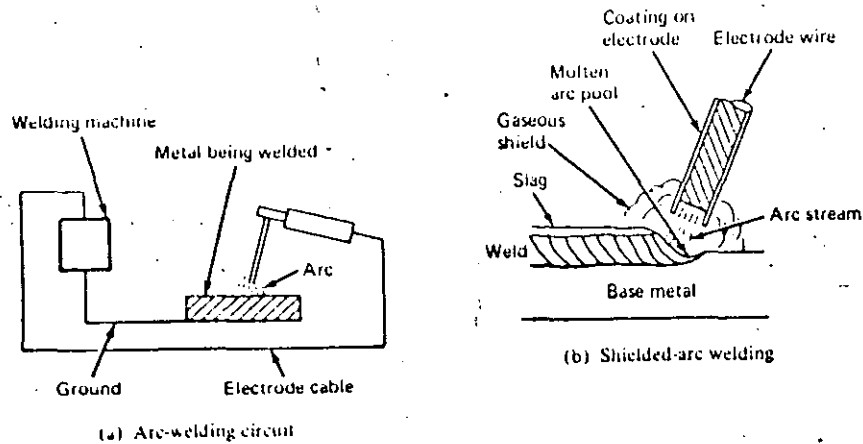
Shielded metal-arc welding.
